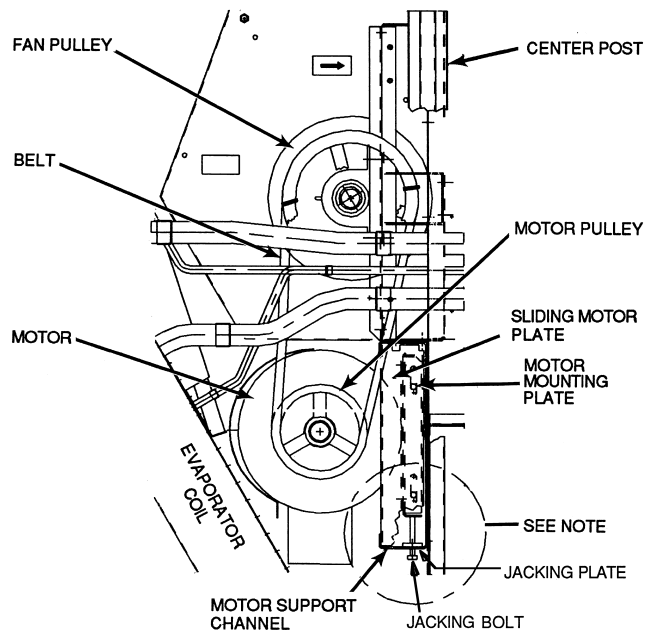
48TJ016 Evaporator-Fan Motor Adjustment
